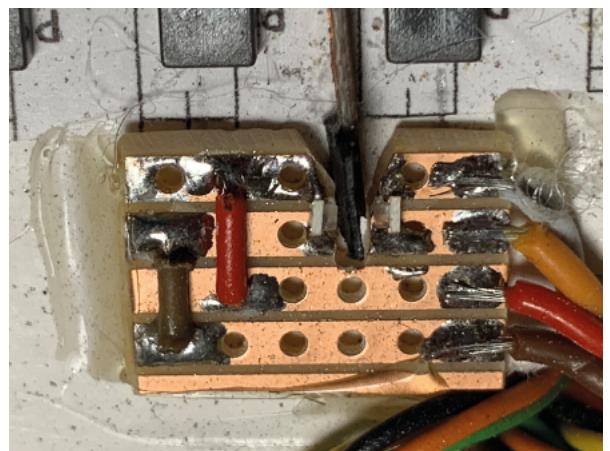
Close up of a fabricated photo-interrupter, 0603 components mounted on their side.
